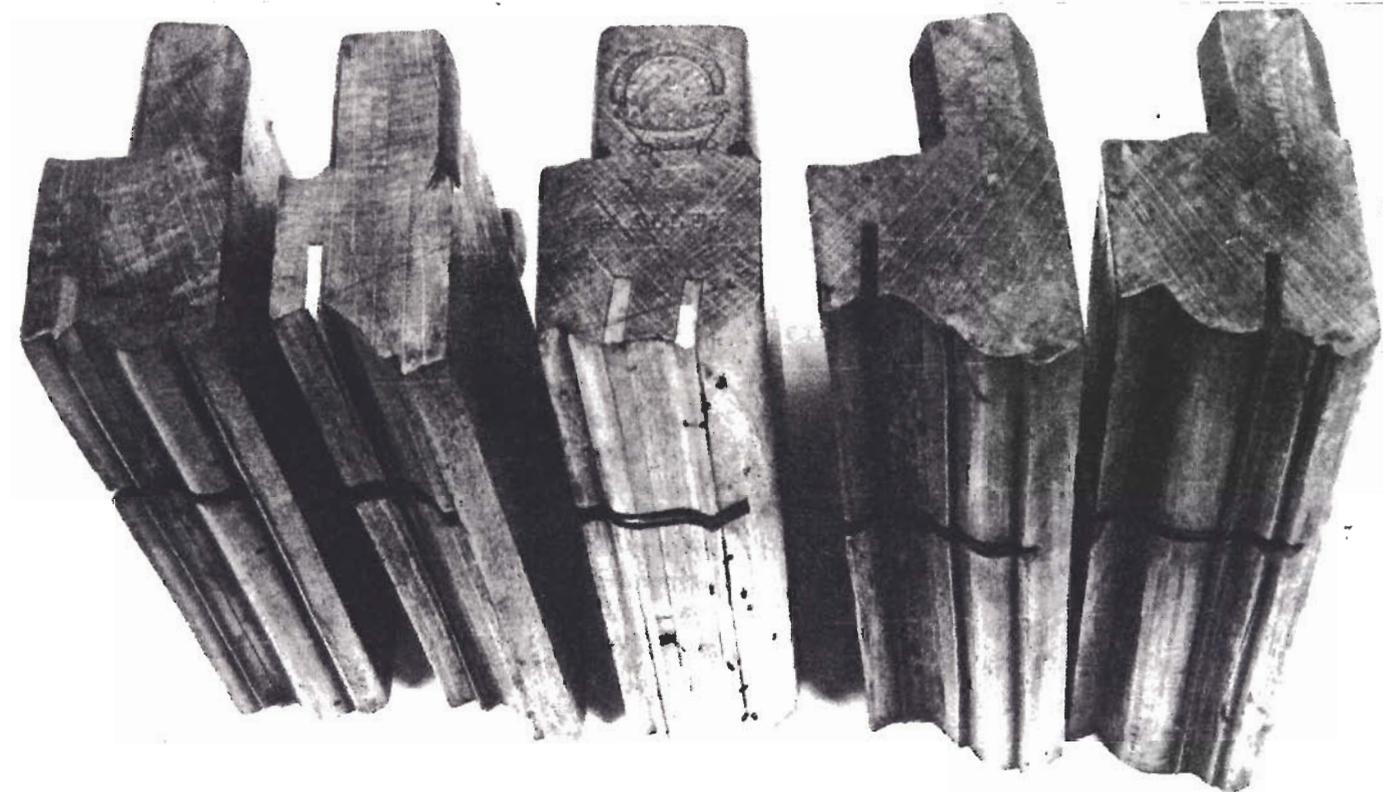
Complex Moulding Planes of American Manufacture, 1800 - 1825.
